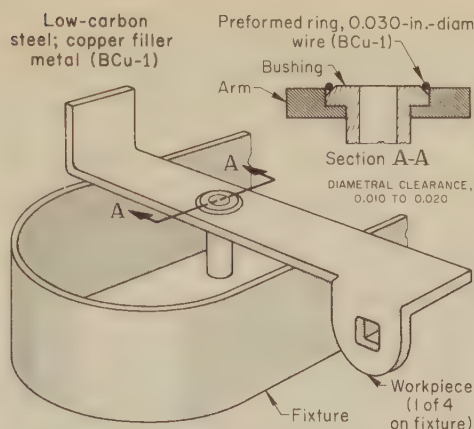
Arm-and-bushing assembly in position on a simple steel-strap fixture, ready for furnace brazing
